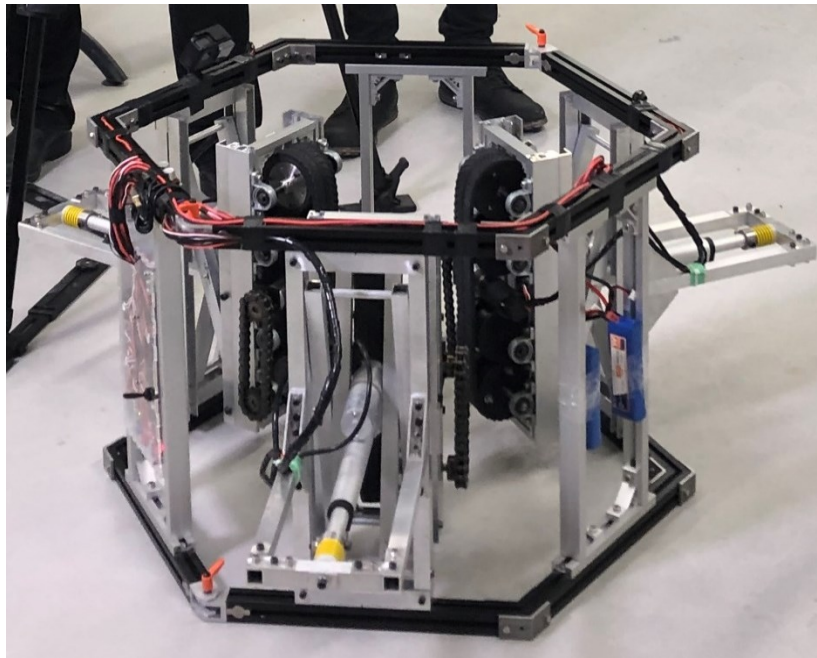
FINAL CHASSIS ASSEMBLY CLOSED HEXAGON
